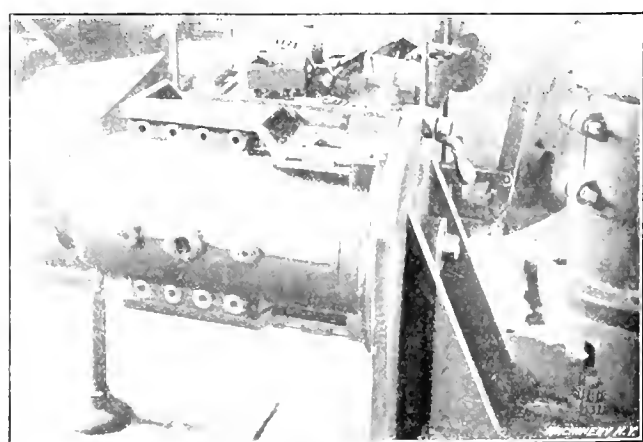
Drilling and Tapping Inlet and Exhaust Box Pads
